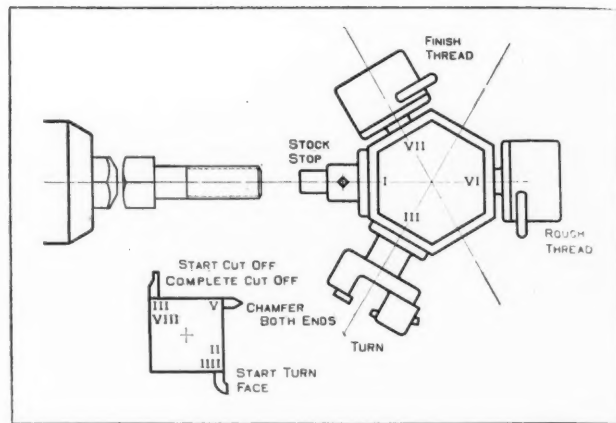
Tooling Lay-out for Turret Lathe for Making Tap Bolts in Lots of Forty
